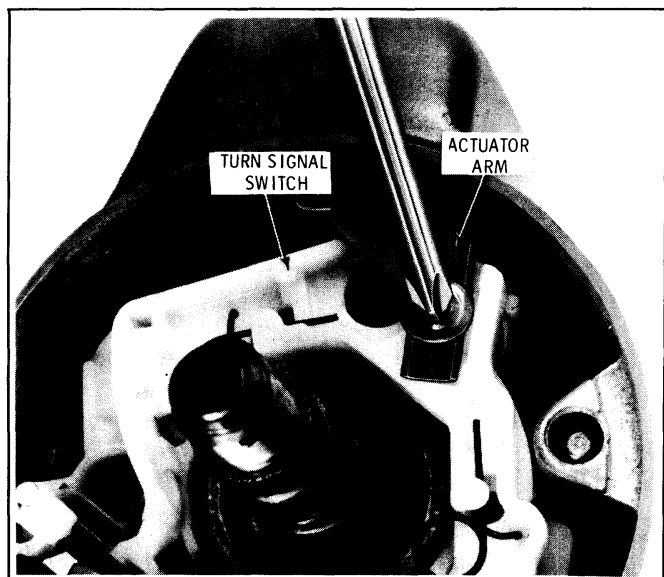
B-63--Removing Actuator Arm - Chevrolet
